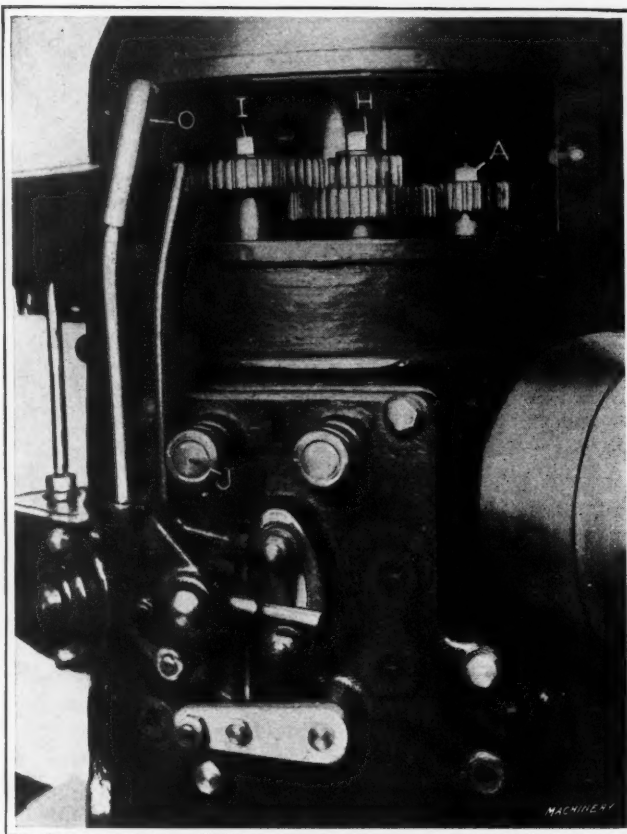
Close-up View of Control Levers and Mechanism at the Operating Side of the Machine
